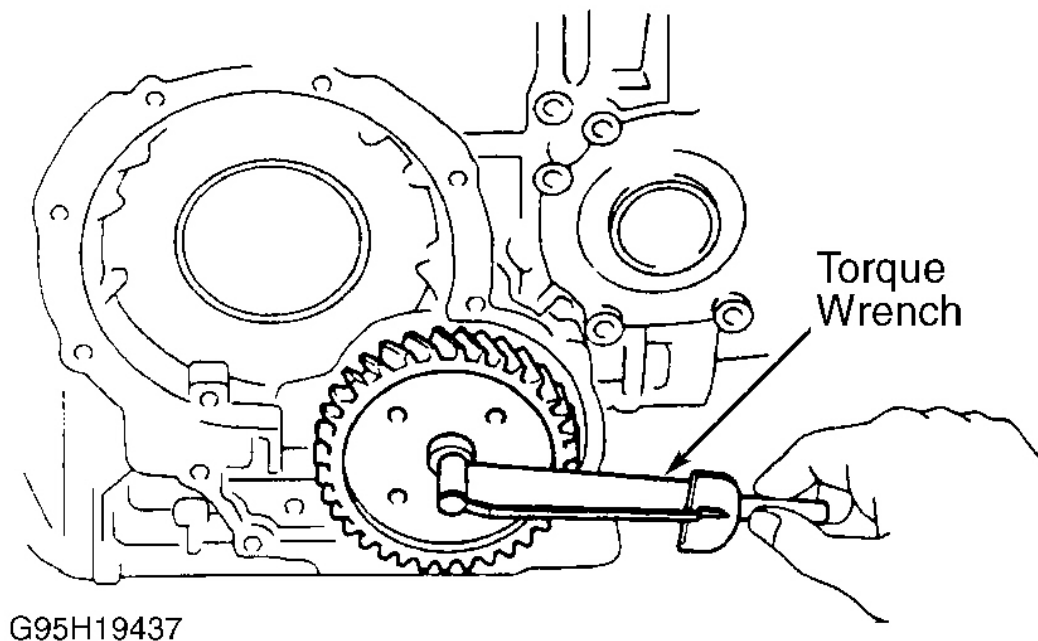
Checking Driven Pinion Preload Or Total Preload
